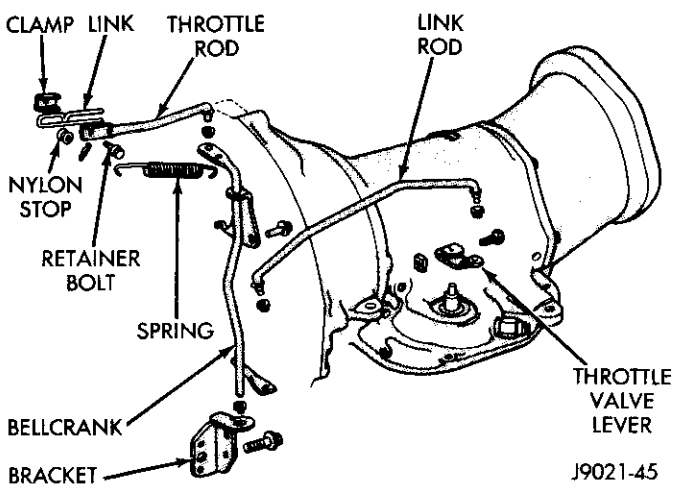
Throttle Valve Linkage – 8 Cylinder Engine
